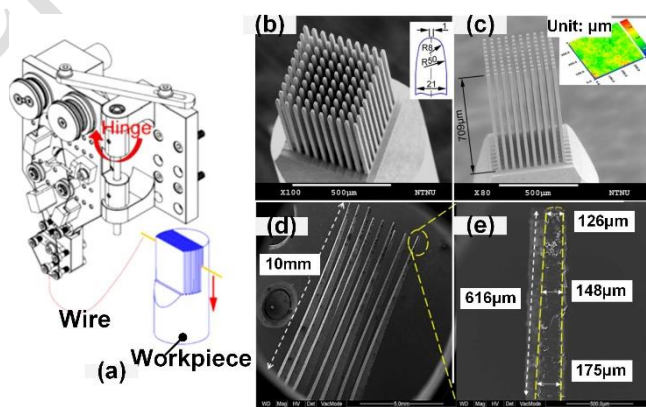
(a) A precise CNC machine tool for the micro-wire EDM (WEDM); (b) Tool arrays from an isometric view; (c) Tool arrays from a front view (Chen, 2008); (d) 3×3 multi-tool tip array; (e) Details of the tool surface (Arab et al., 2019b).
